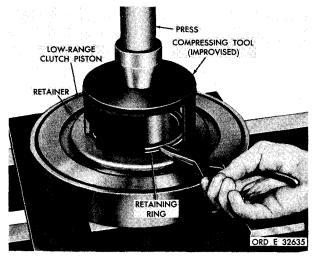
Removing (or installing) retaining ring for low-range piston return spring retainer
